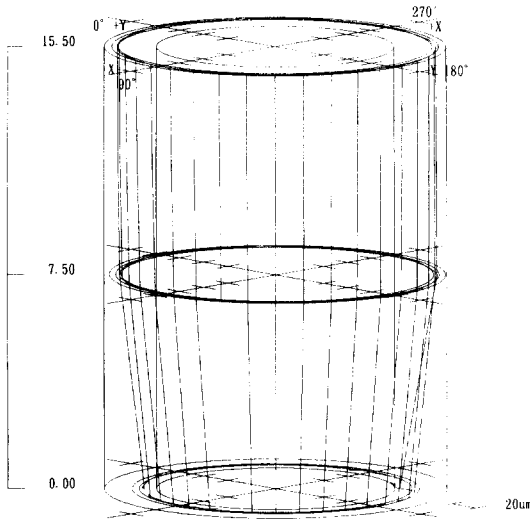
Several Accuracies of Gun Drilled Hole by 3D Measuring m/c.
